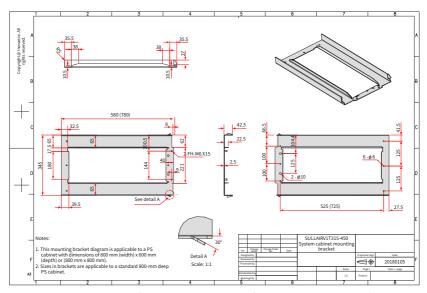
Dimensions of the mounting bracket for 315–450 kW models (standard configuration)
